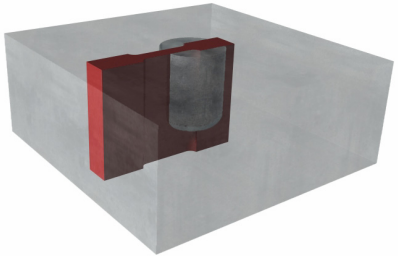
Position of Charpy impact specimen in a single-weld base plate.
